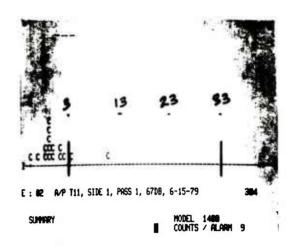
POROSITY DETECTED AT START OF WELD CONTAINING INCOMPLETE PENETRATION
